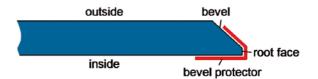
Cross-section of bevel edge protector, which must not be damaged or removed
